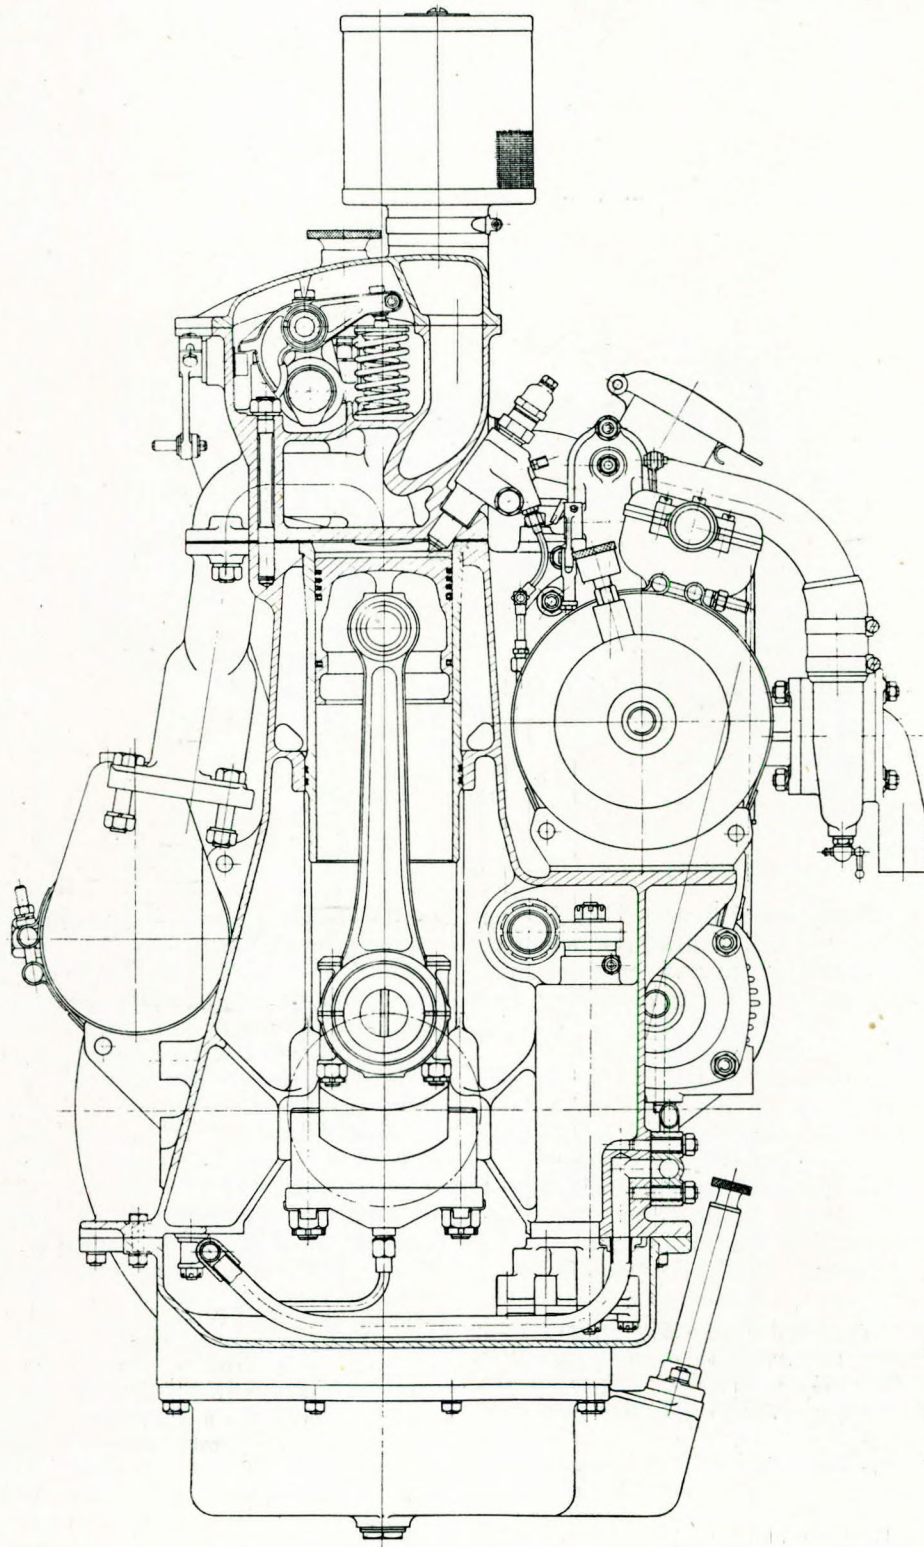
Sectional Drawing of Beardmore 6 cylr., 4½in.×6in., 90 b.h.p. Marine Diesel Engine.
